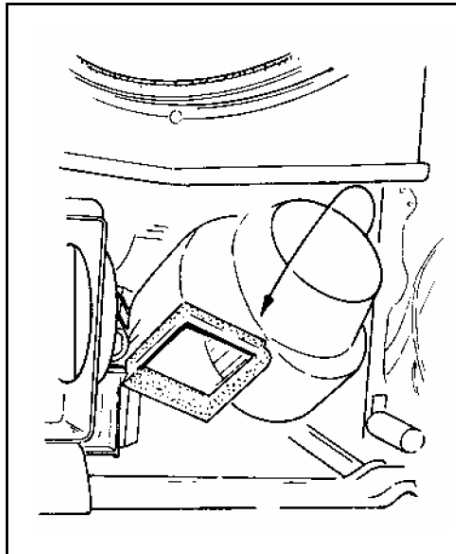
Cooling Fan Removal 3 (Machine Nos. without Prefix)
